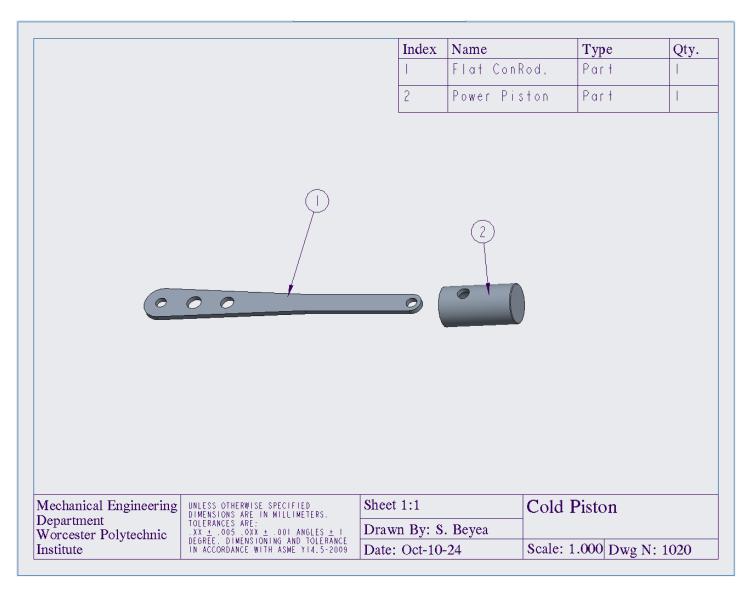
exploded view of the cold piston assembly (with balloons and BOM).
